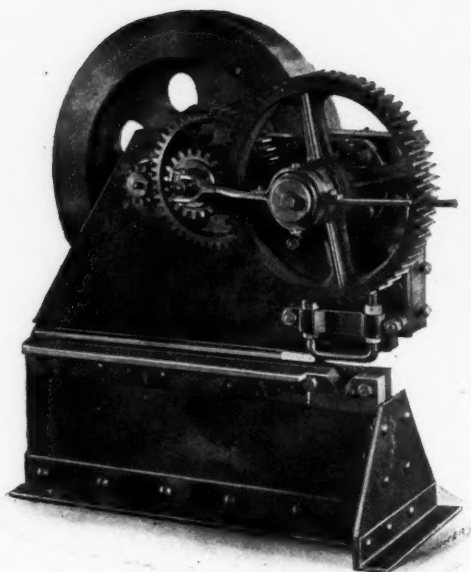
No. 24 Buffalo Slitting Shear built with an Armor Plate Frame
